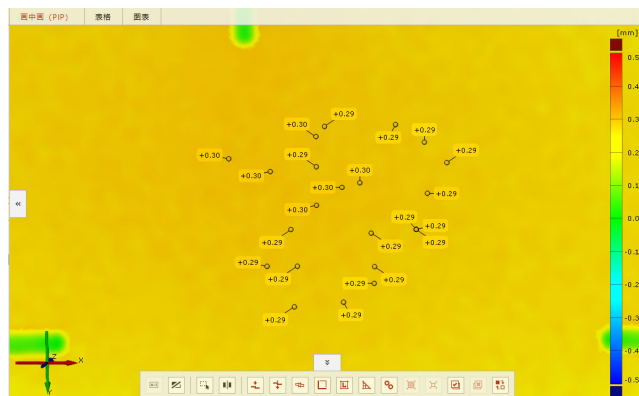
Surface inspection cloud of sheet metal parts without spray developer defects1.
